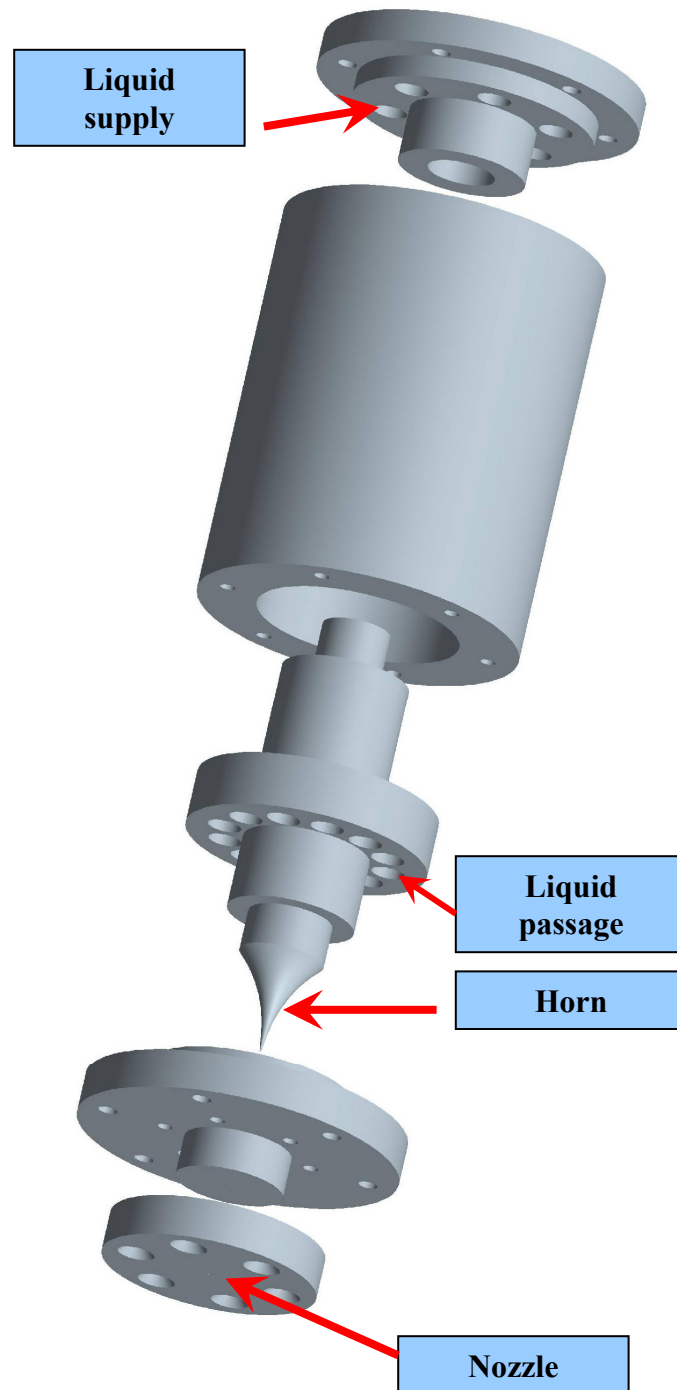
Exploded view of the atomizer prototype © Vedanth Srinivasan, Abraham J.
